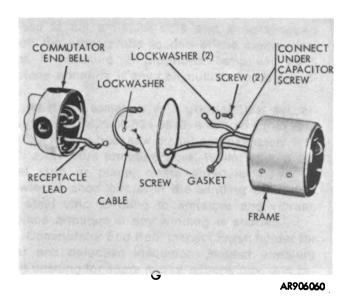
Turret ventilating blower disassembly or assembly (2 of 3).
